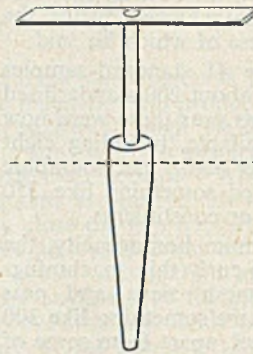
Shaped Chill Insert used for Producing an Awkward Cavity in an Aluminium-alloy Casting.
